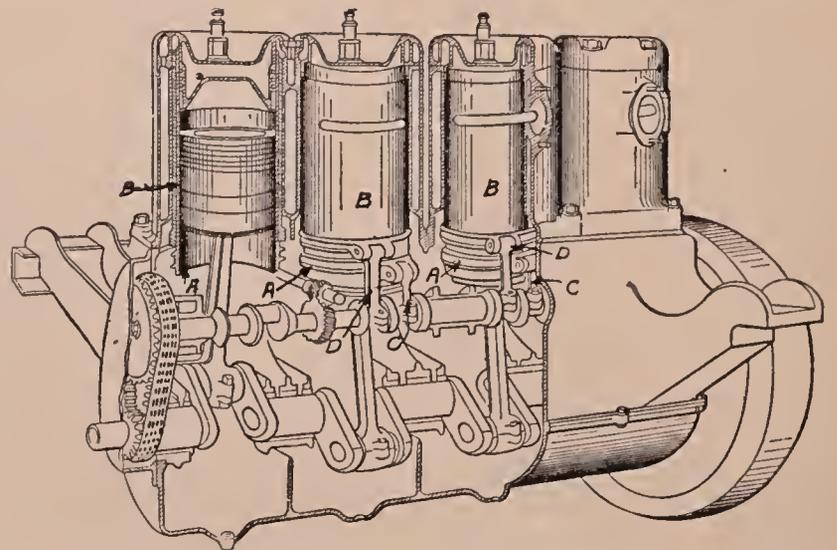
Section Through the Knight Sleeve Valve Motor, Indicating the Two Sleeves Which Replace the Valves, and the Eccentrics Which Drive Them.
